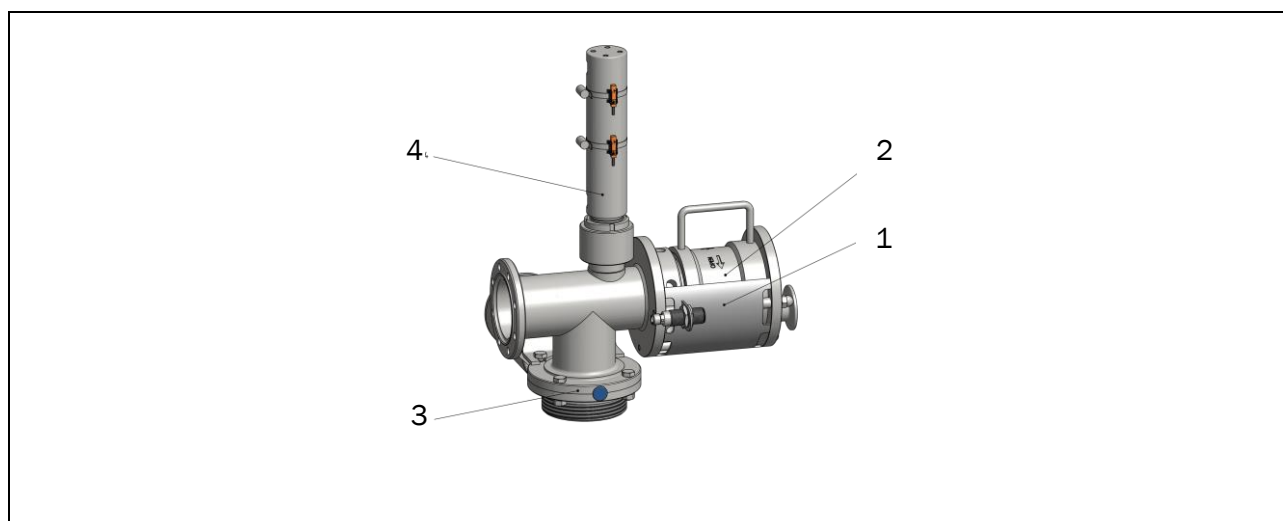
Overview of Plug-in Chamber with Stopper and Butterfly Valve
